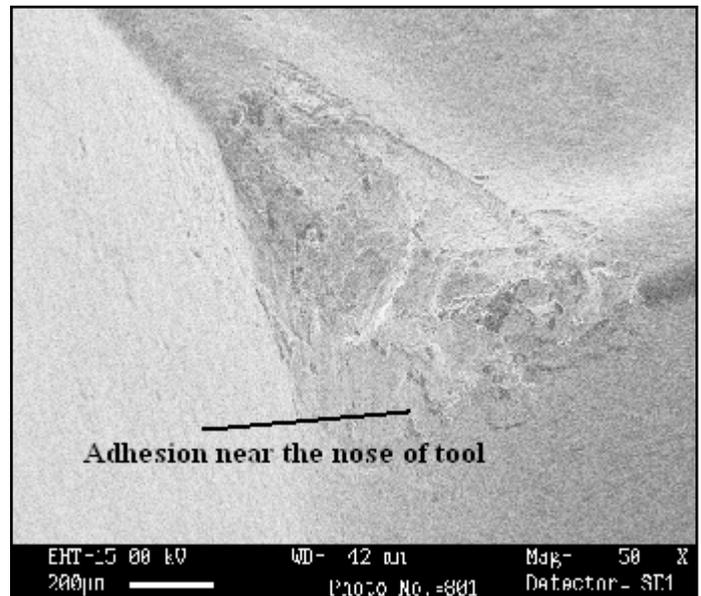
The Cutting Insert After 3minutes of machining at  $v=130\text{m/min}$ ,  $f=.16\text{mm/rev}$  and  $W.H.=45\text{HRC}$
